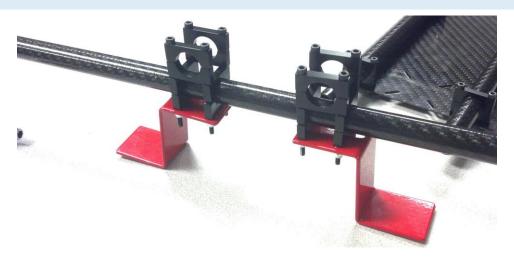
Pass a 20" tube through two landing gear subassemblies as shown
